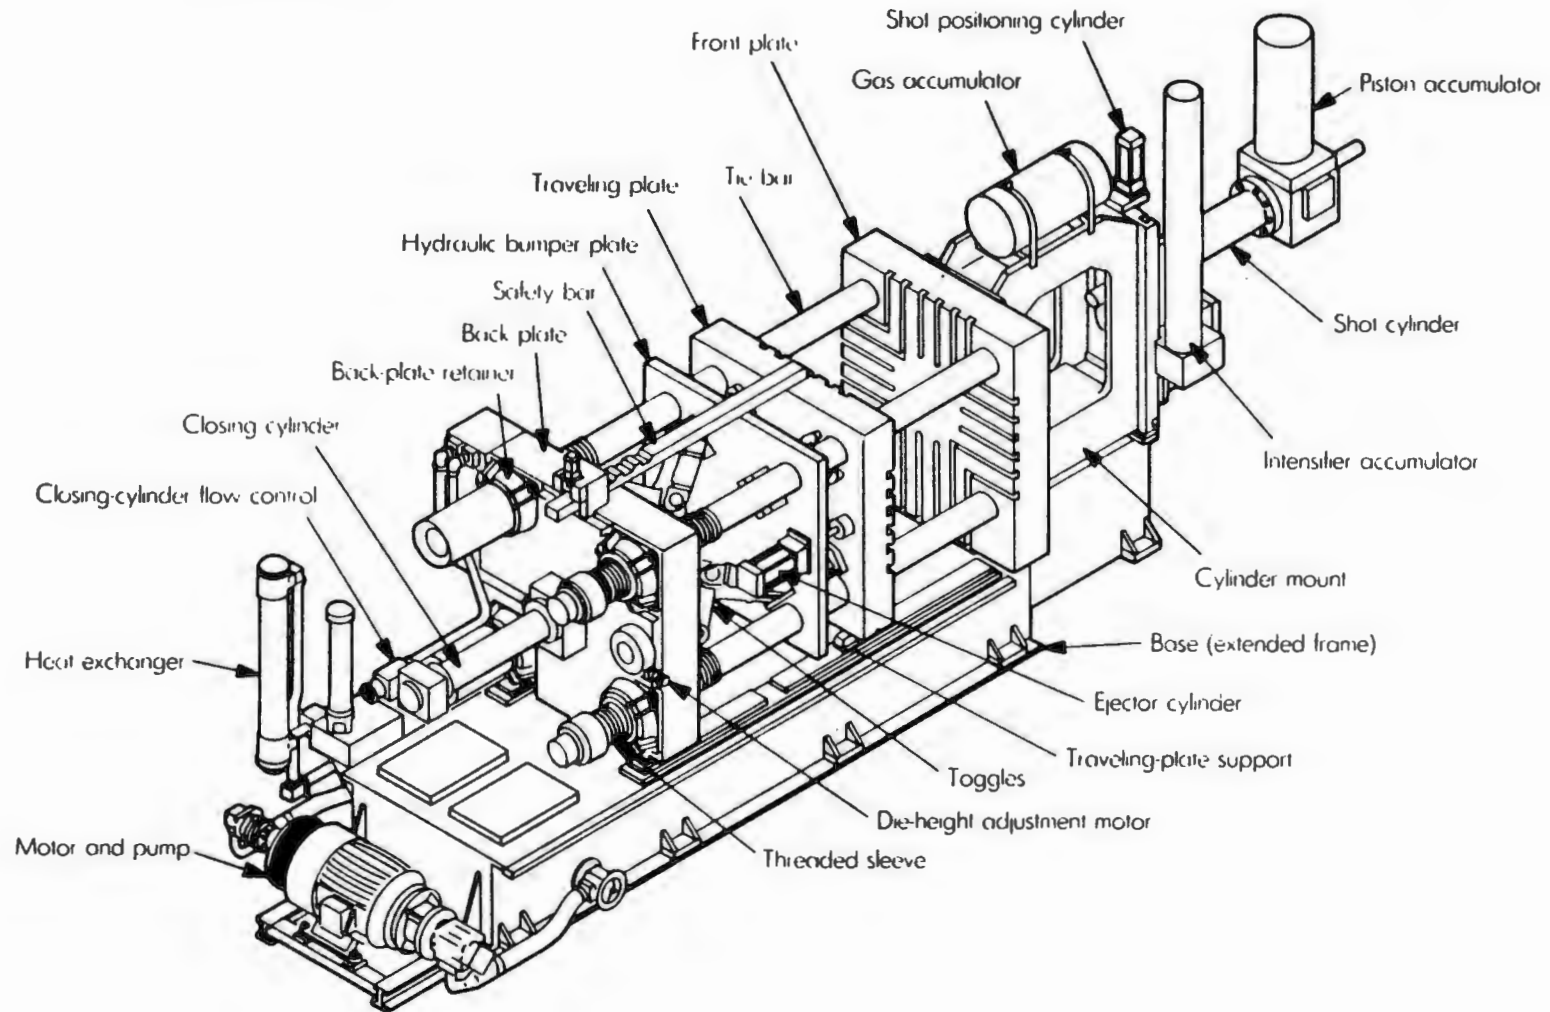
General Layout of a Typical Cold-Chamber Die Casting Machine (Reprinted from [13])
